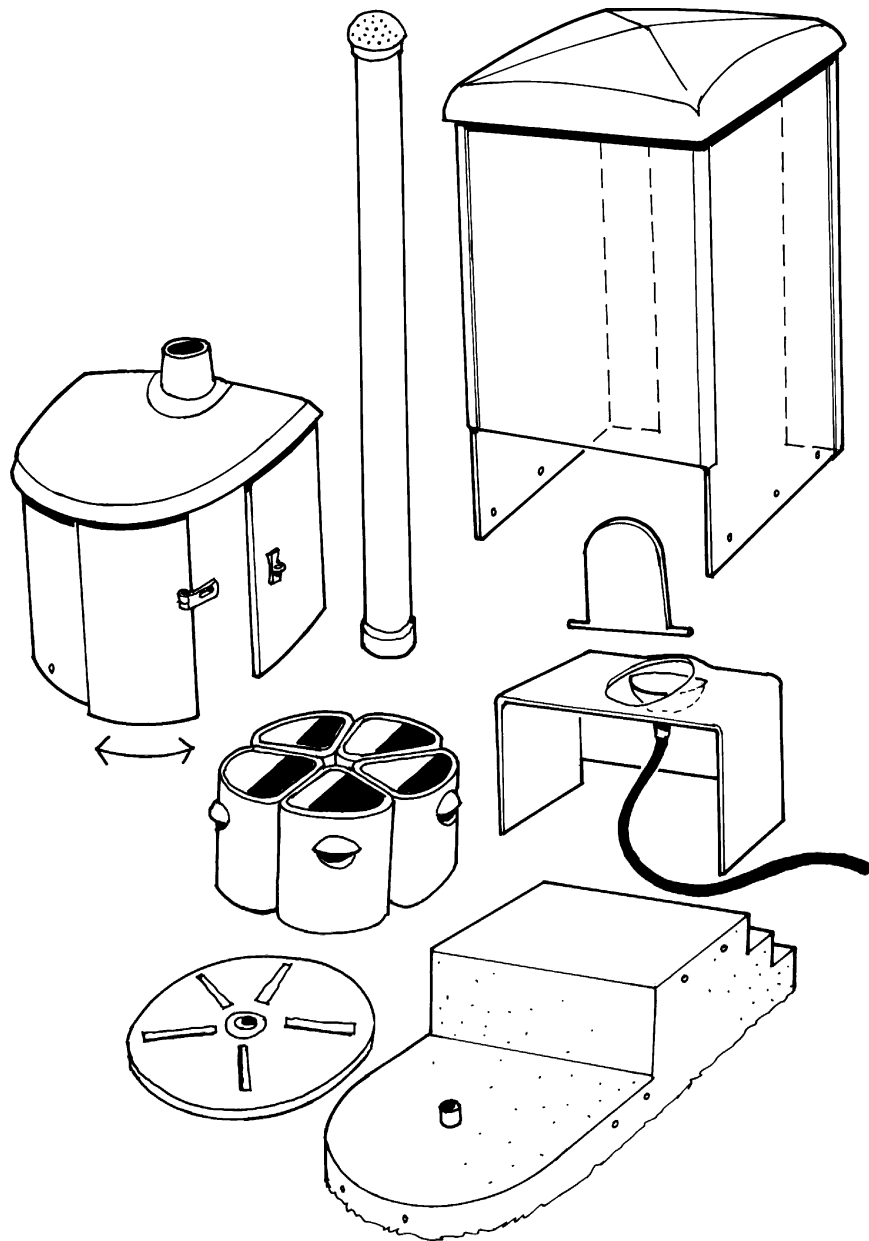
Exploded view of the toilet in Figure 5.4.
